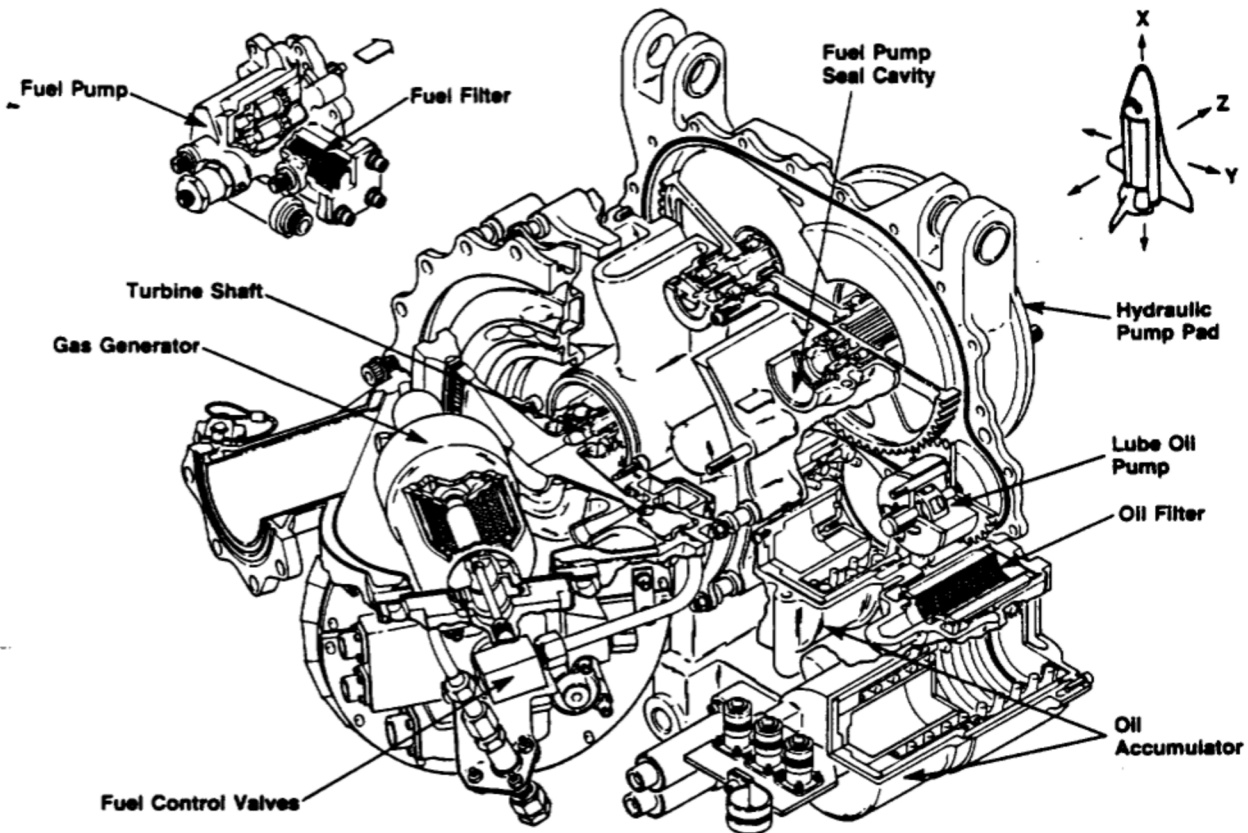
AUXILIARY POWER UNIT ASSEMBLY.
